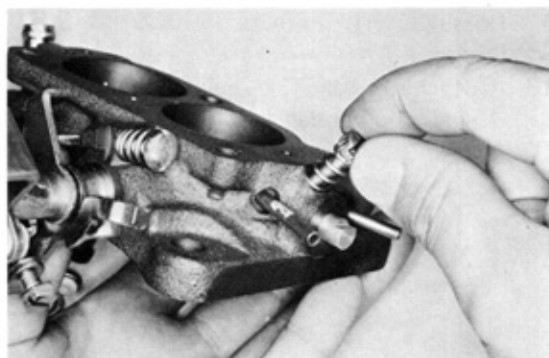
Install Idle Mixture Adjusting Screw.
